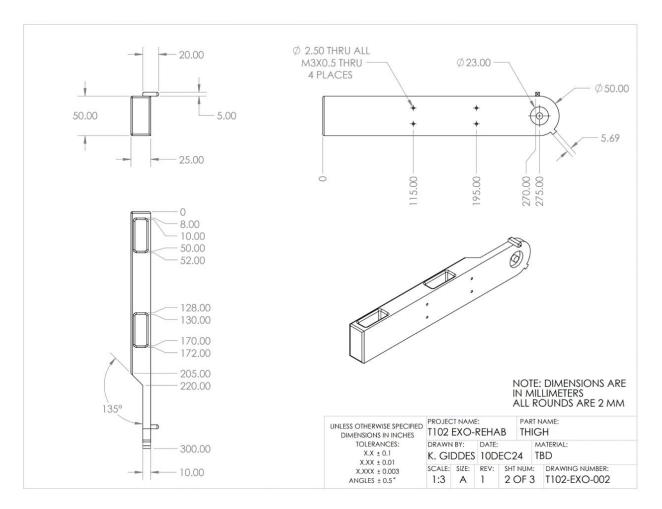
Technical drawing of the thigh part. This part provides stability during mechanical movements. Made using SolidWorks.
